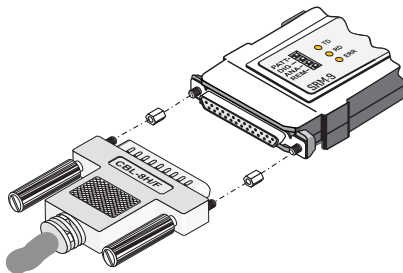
Connecting SRM-9/V.35 to the CBL-8H/F Cable
